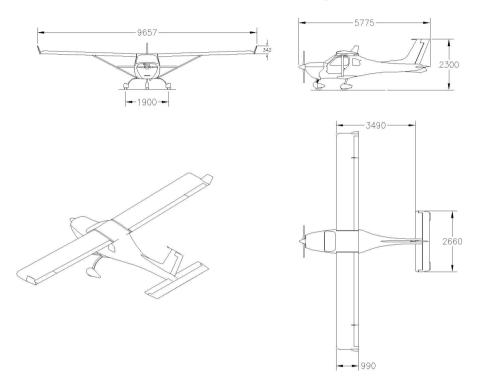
Three View Drawing of the J170-C Note: All dimensions in millimetres
